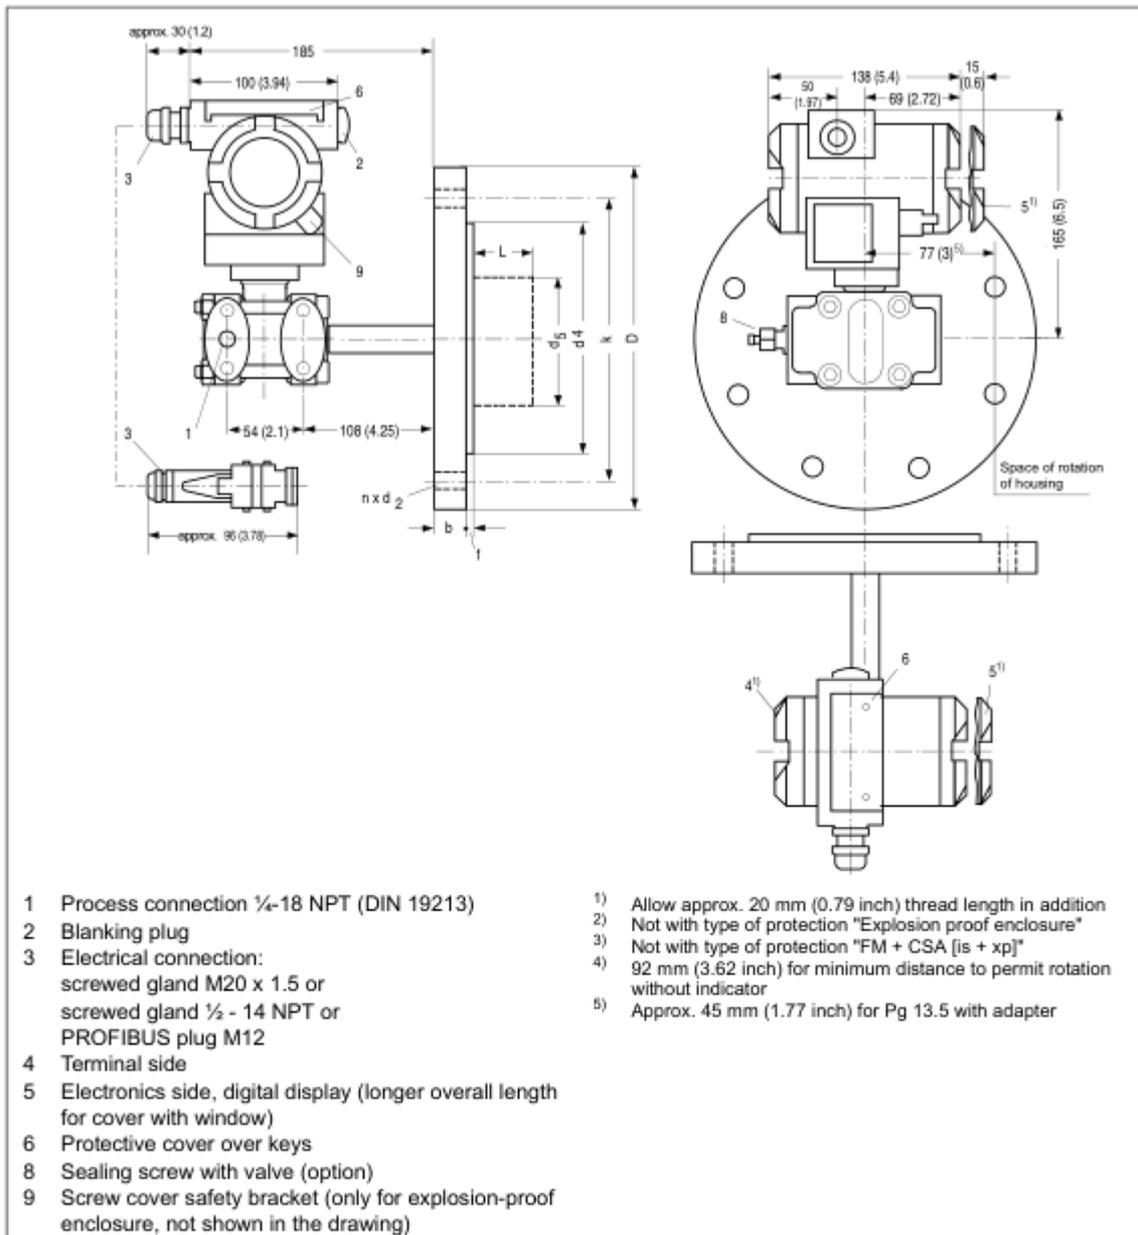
Dimensions of DS III PA series for level (transmitter including mounting flange), dimensions in mm (inches)
